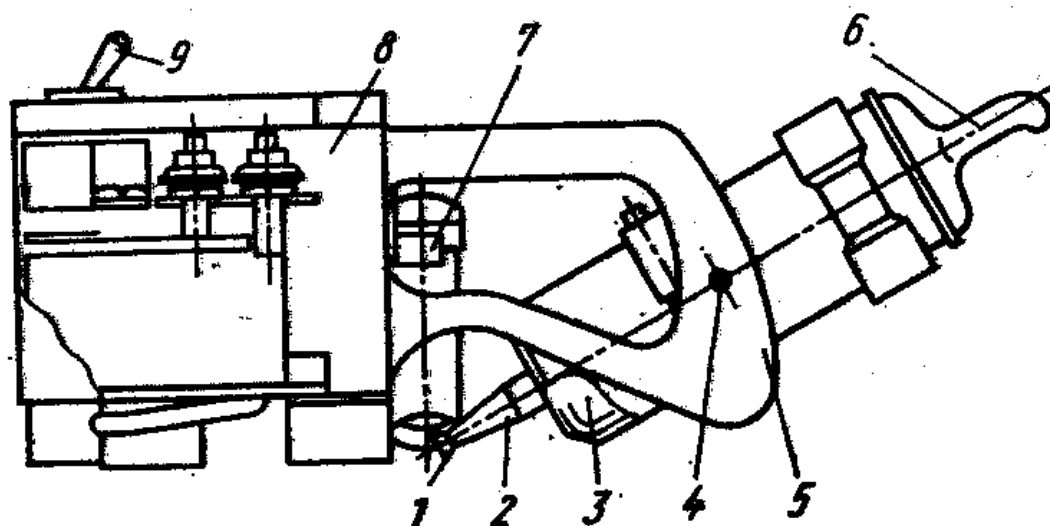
Device for making holes on the surfaces of guide machines: 1 – roller; 2 – mandrel; 3 – electric motor; 4 – axis; 5 – bracket; 6 – handle; 7 – illuminator; 8 – electromagnet; 9 - switch
